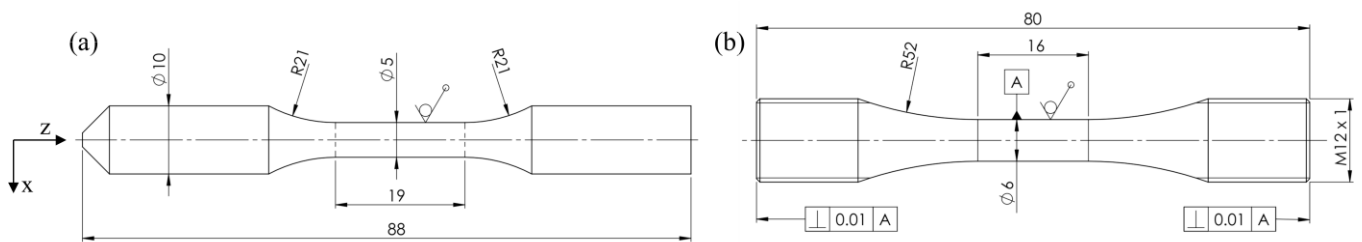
Specimen employed in the tensile (a) and HCF (b) tests. Dimensions in millimeters.
